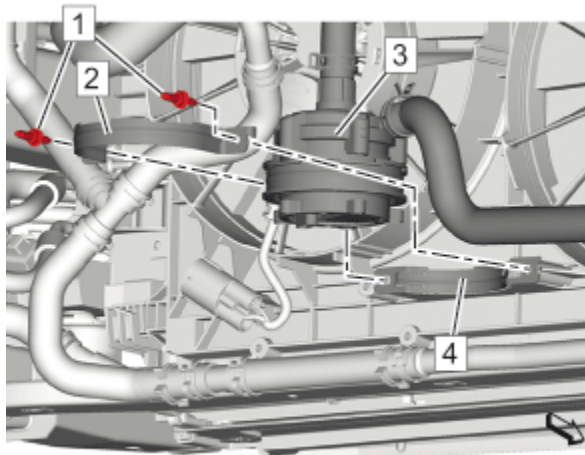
Drive Motor Battery Coolant Pump Bracket Studs
